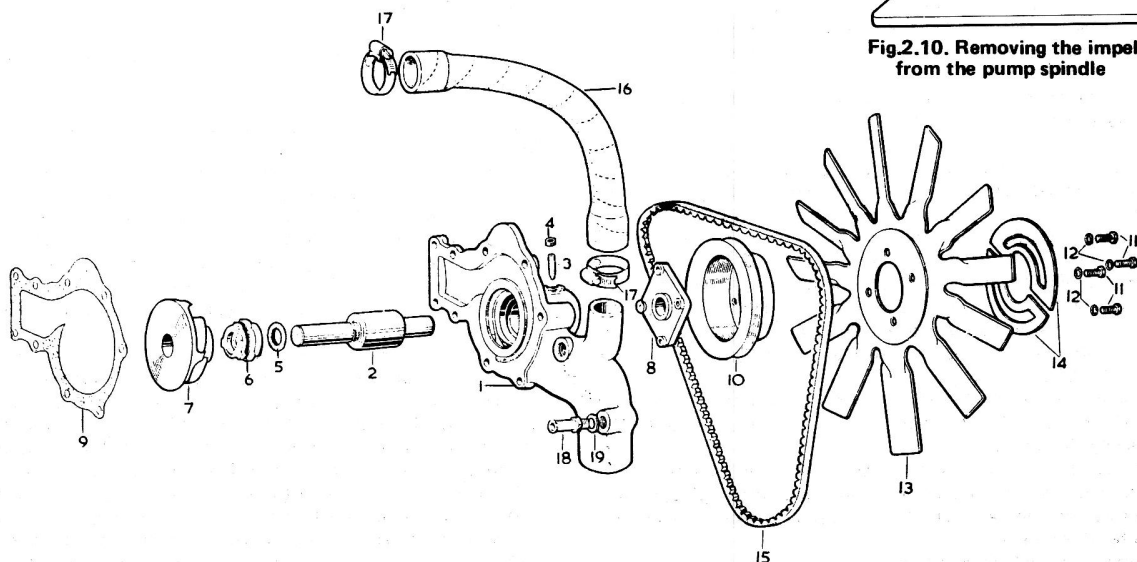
EXPLODED VIEW OF THE WATER PUMP
